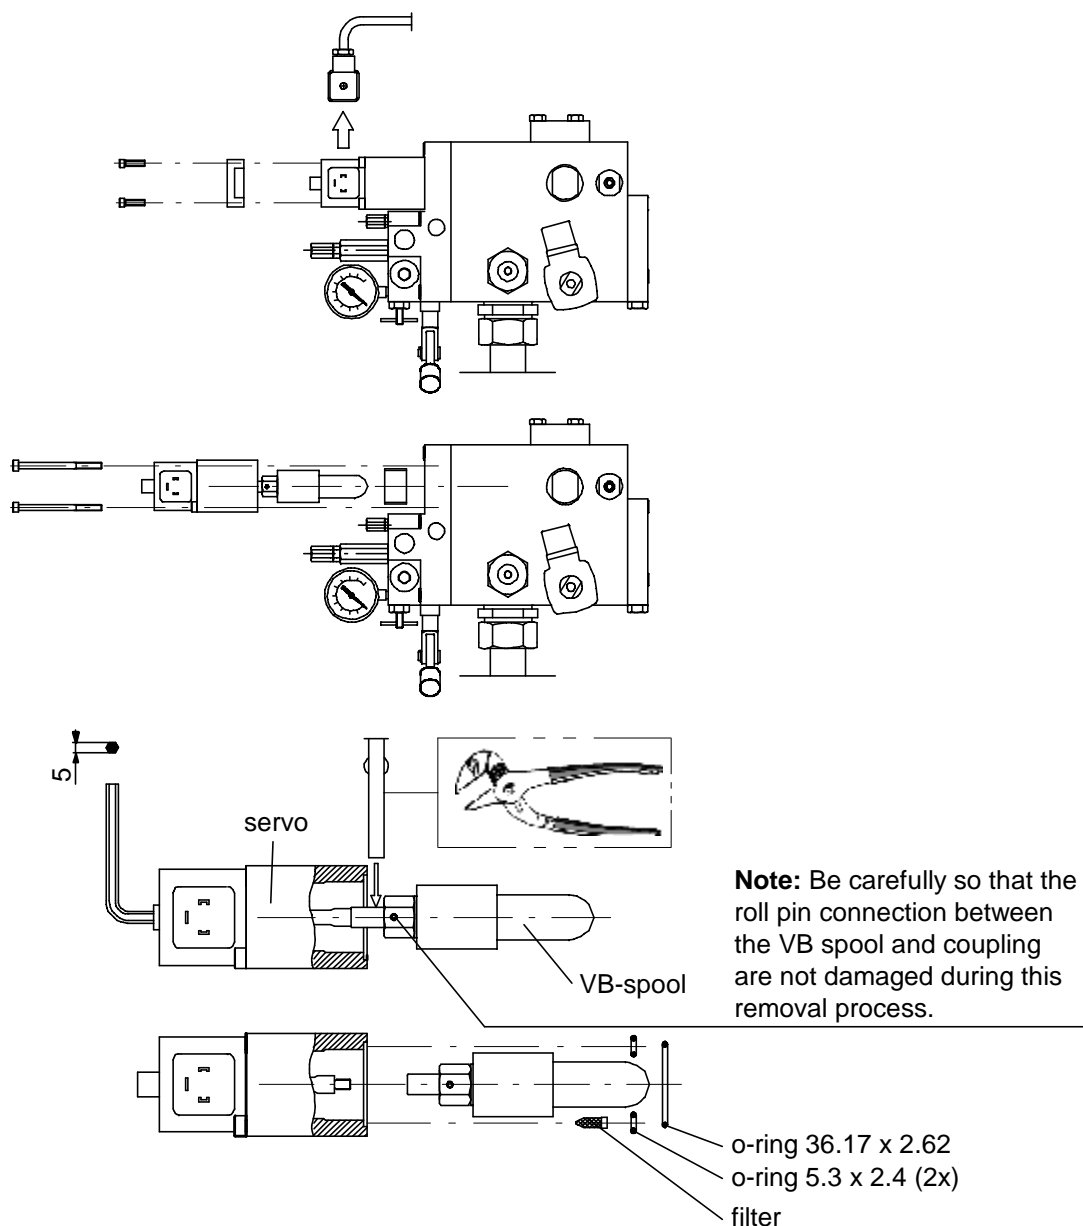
Exchange of servo valve (Valve size 52-216 l/min)
